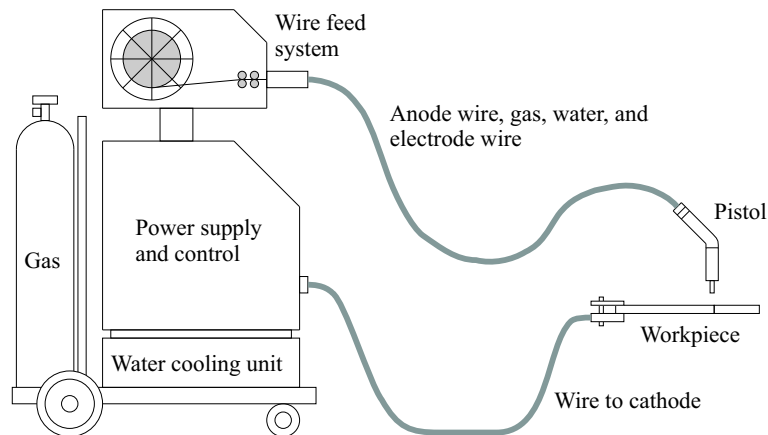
Illustration of Migatronix's Flex 4000 welding machine, the overall process setup.
